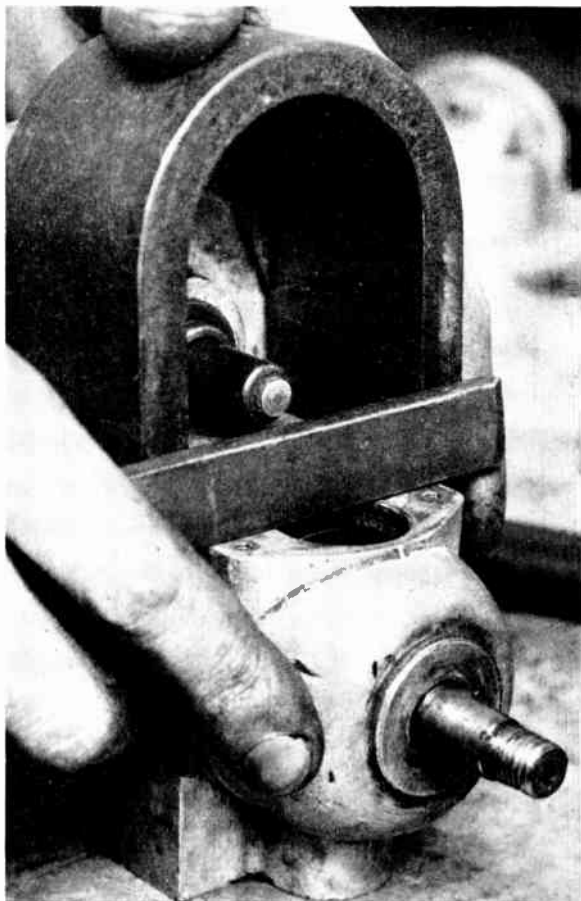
REMOVING MAGNET FROM A MOTOR-CAR MAGNETO. Showing the soft iron keeper in position. (Euston Lighting and Ignition Co., Ltd.)
